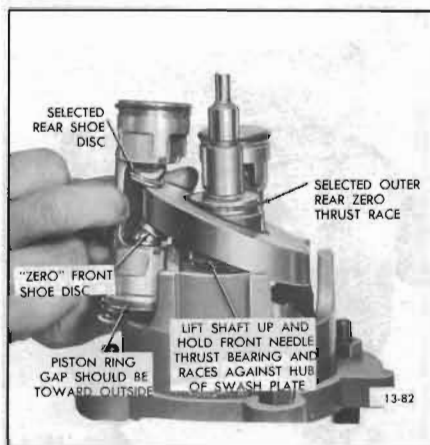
Installing Piston Assembly in Front Cylinder Half
